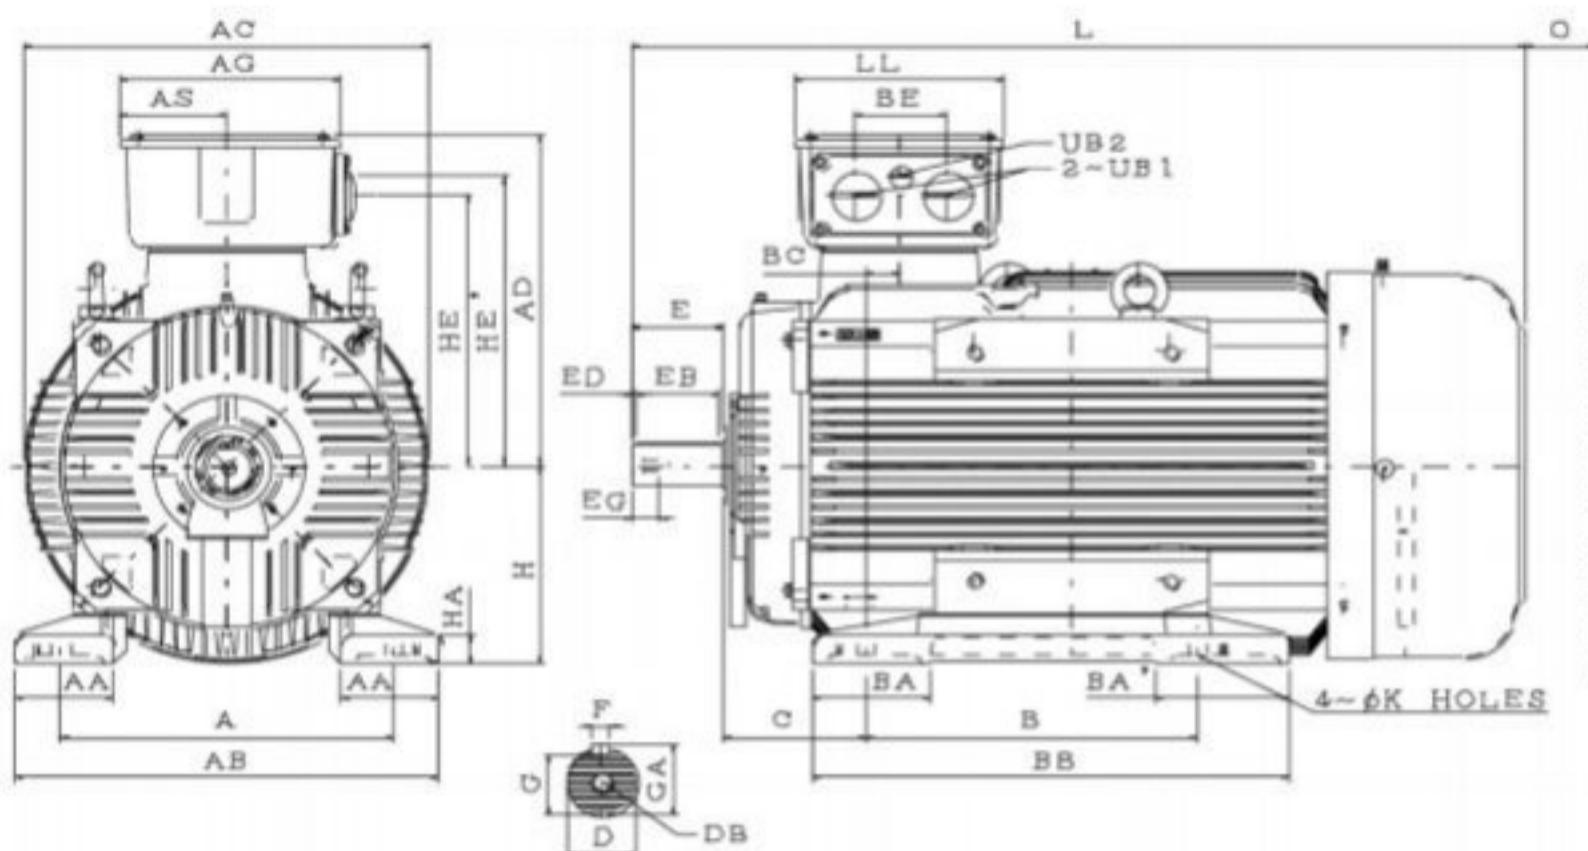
Outline drawing of cast iron design, feet version, mounting B3; frame size 315D
